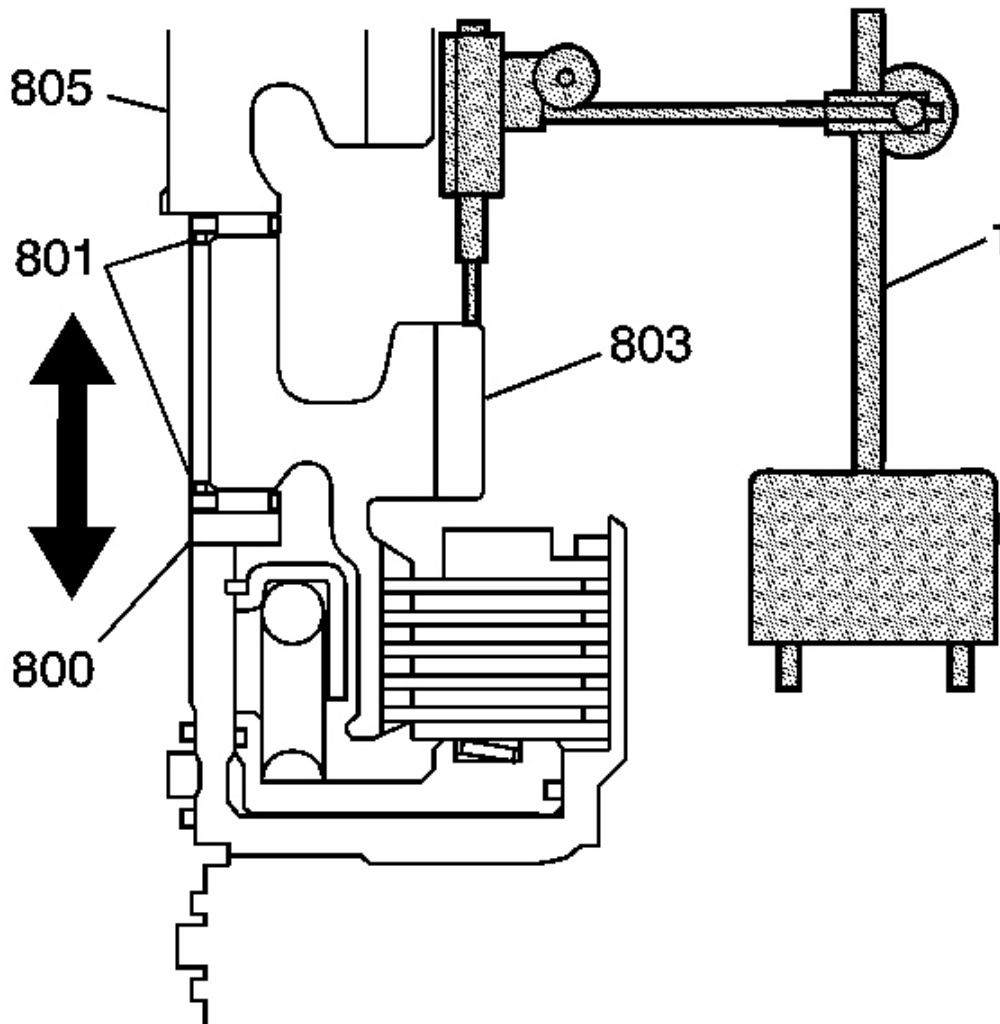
Measuring The 3rd Drive Gear Axial Clearance Using SA9179NE
